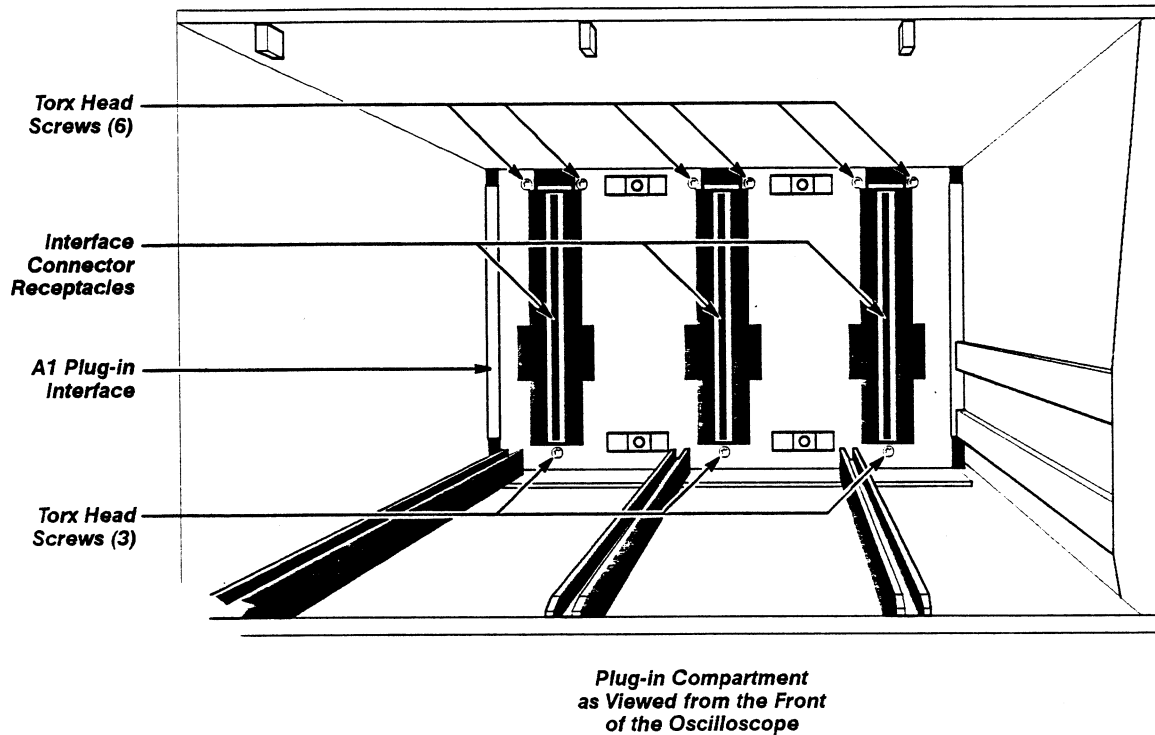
Removing/Replacing the Plug-in Compartment Torx Head Screws
